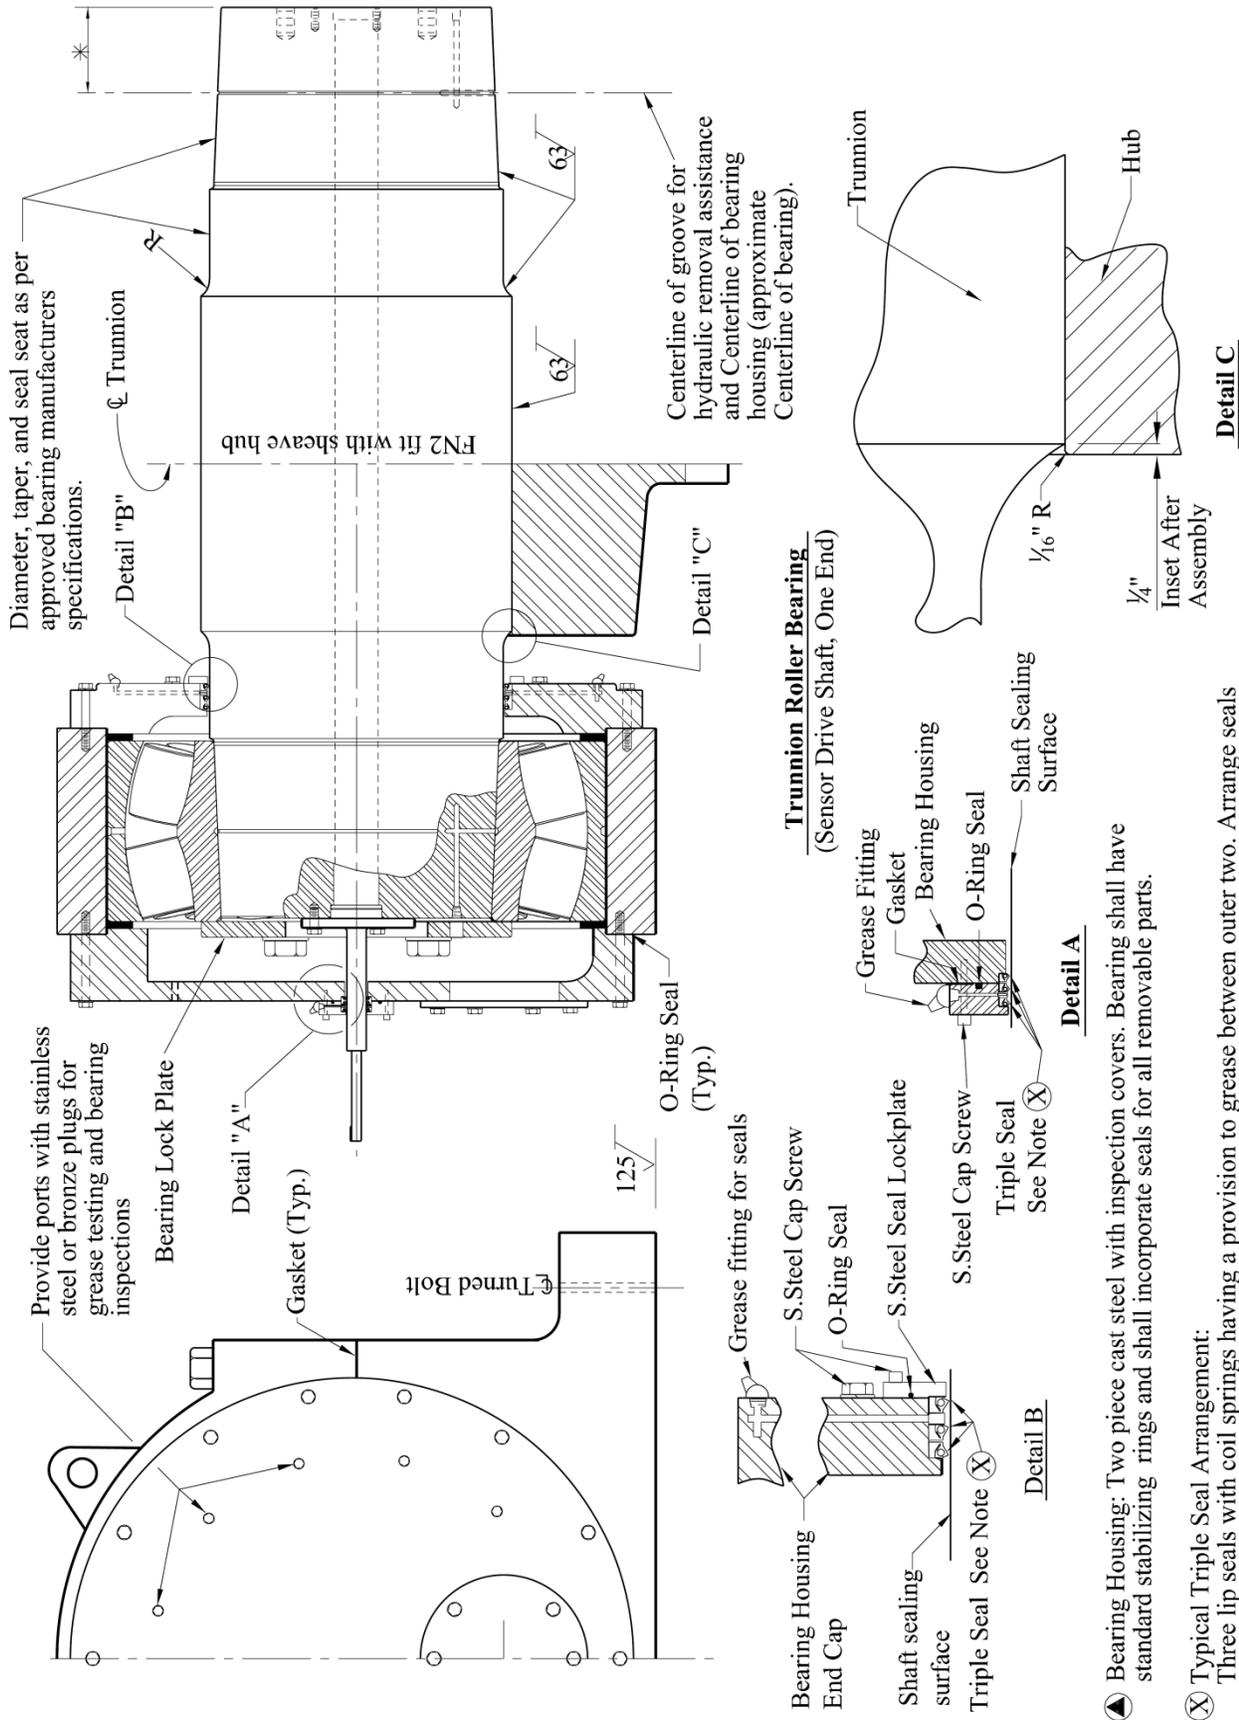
Trunnion Spherical Roller Bearing Assembly
